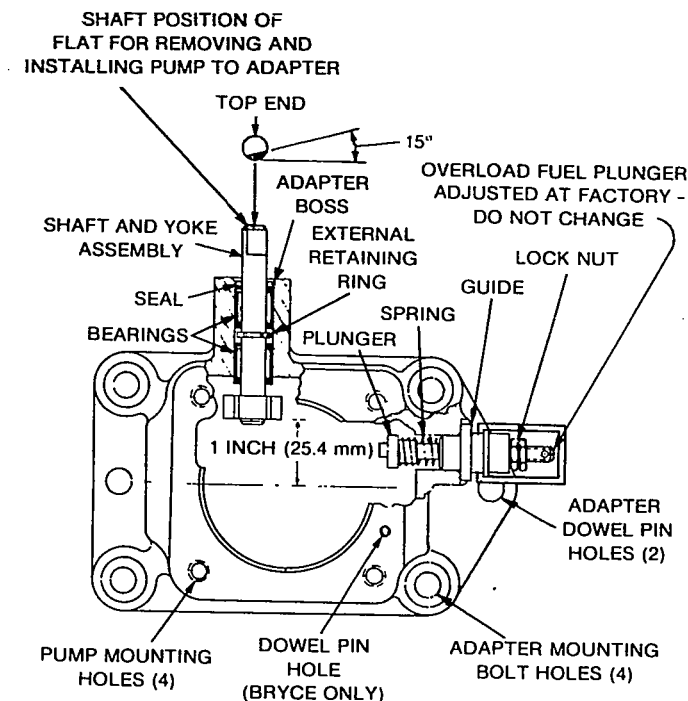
INJECTION PUMP ADAPTER ASSEMBLY
